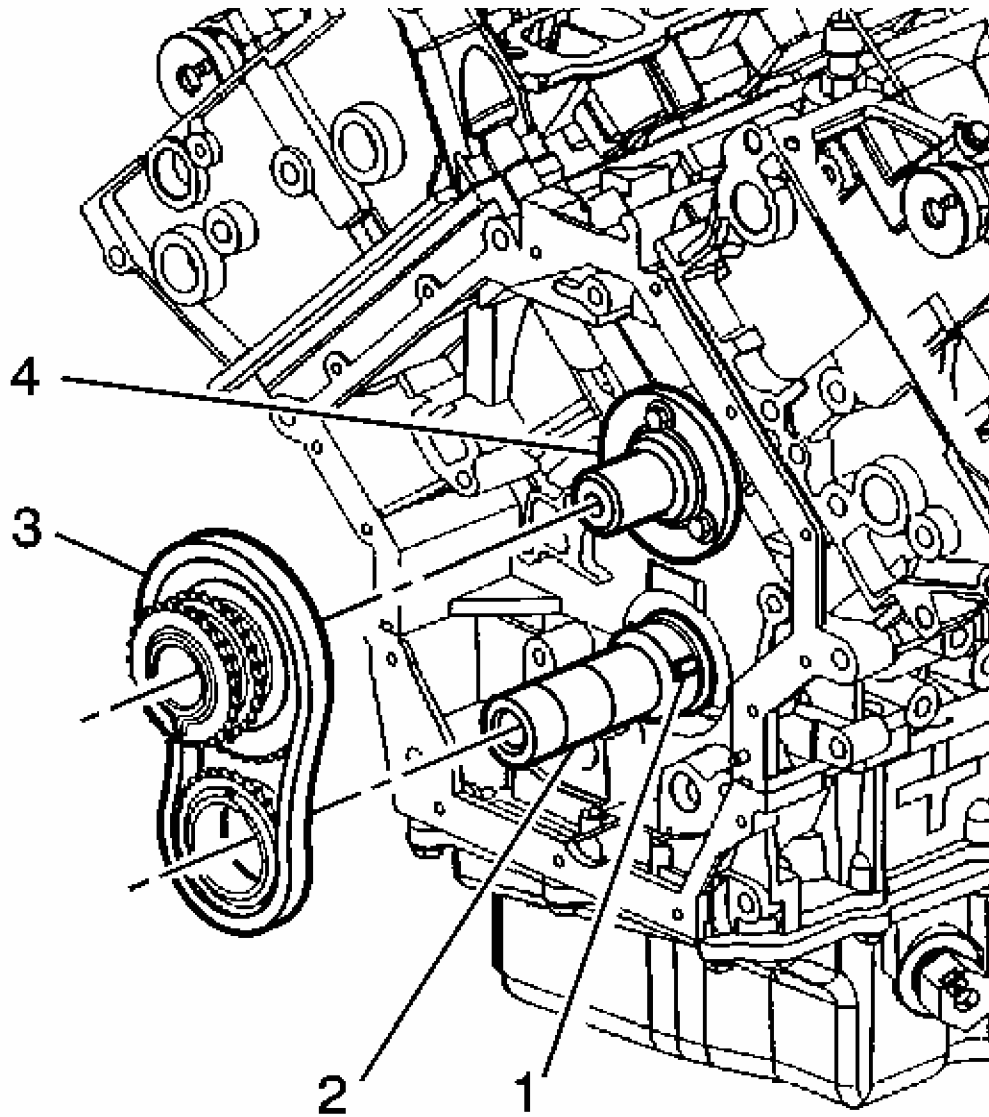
Identifying Camshaft Intermediate Drive Shaft Sprocket, Primary Camshaft Drive Chain & Crankshaft Sprocket
